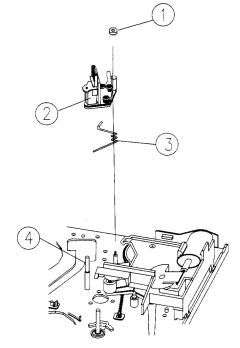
DISASSEMBLY OF THE AC HEAD ASS'Y
